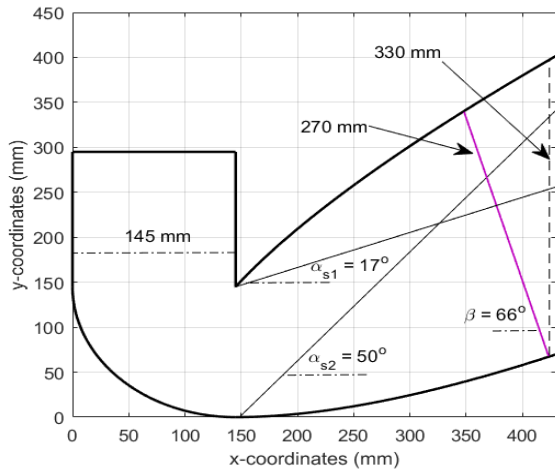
Cross section with dimensions of the solar collector to be fabricated.
